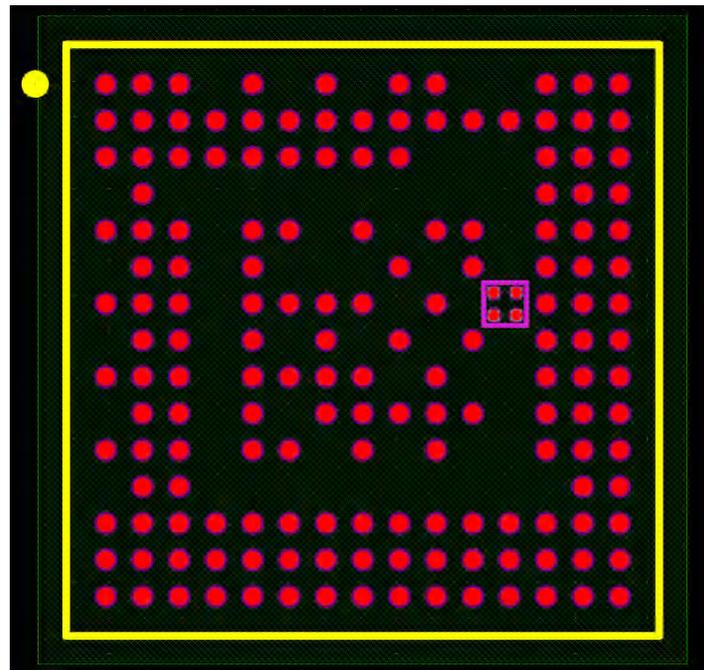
IWR6843 and TMP114 Footprints Rendered in PCB Editor
